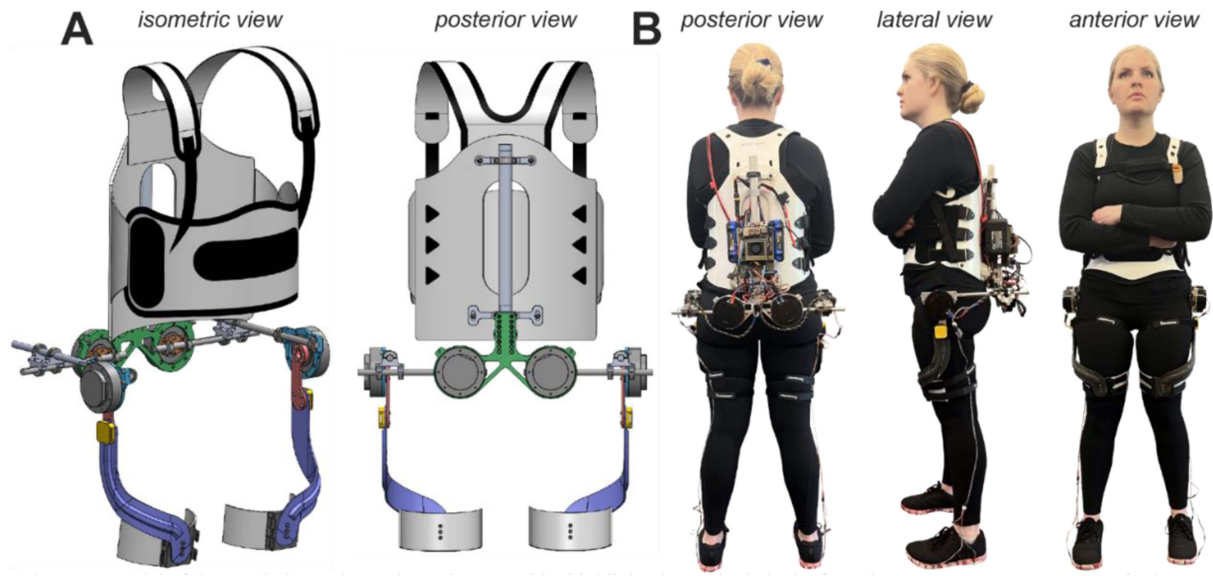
(a) CAD model of the exoskeleton shows the entire assembly; highlighted parts include the frontal actuator mounts (green), sagittal actuator mounts (blue), actuator output shaft attachments (red), upper thigh strap guide (yellow), and carbon fiber thigh strut (purple). (b) Multiple views of the fabricated and worn exoskeleton, including mechatronics setup on the back.
